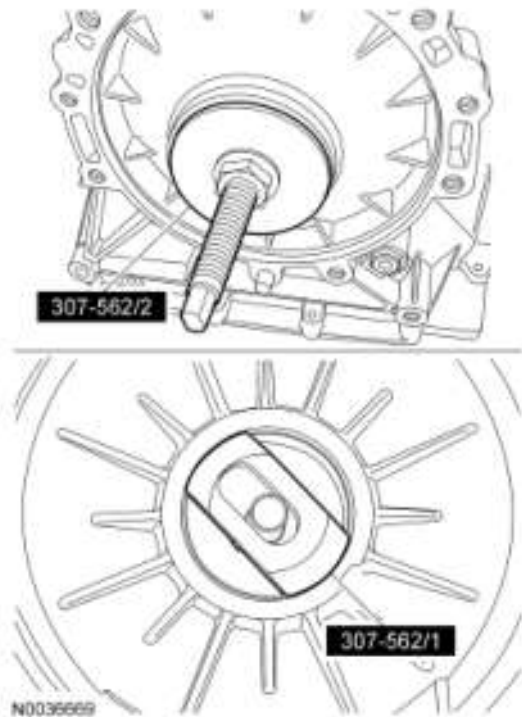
Removing Bearing Assembly Using Special Tool (307-562/1, 307-562/2)
